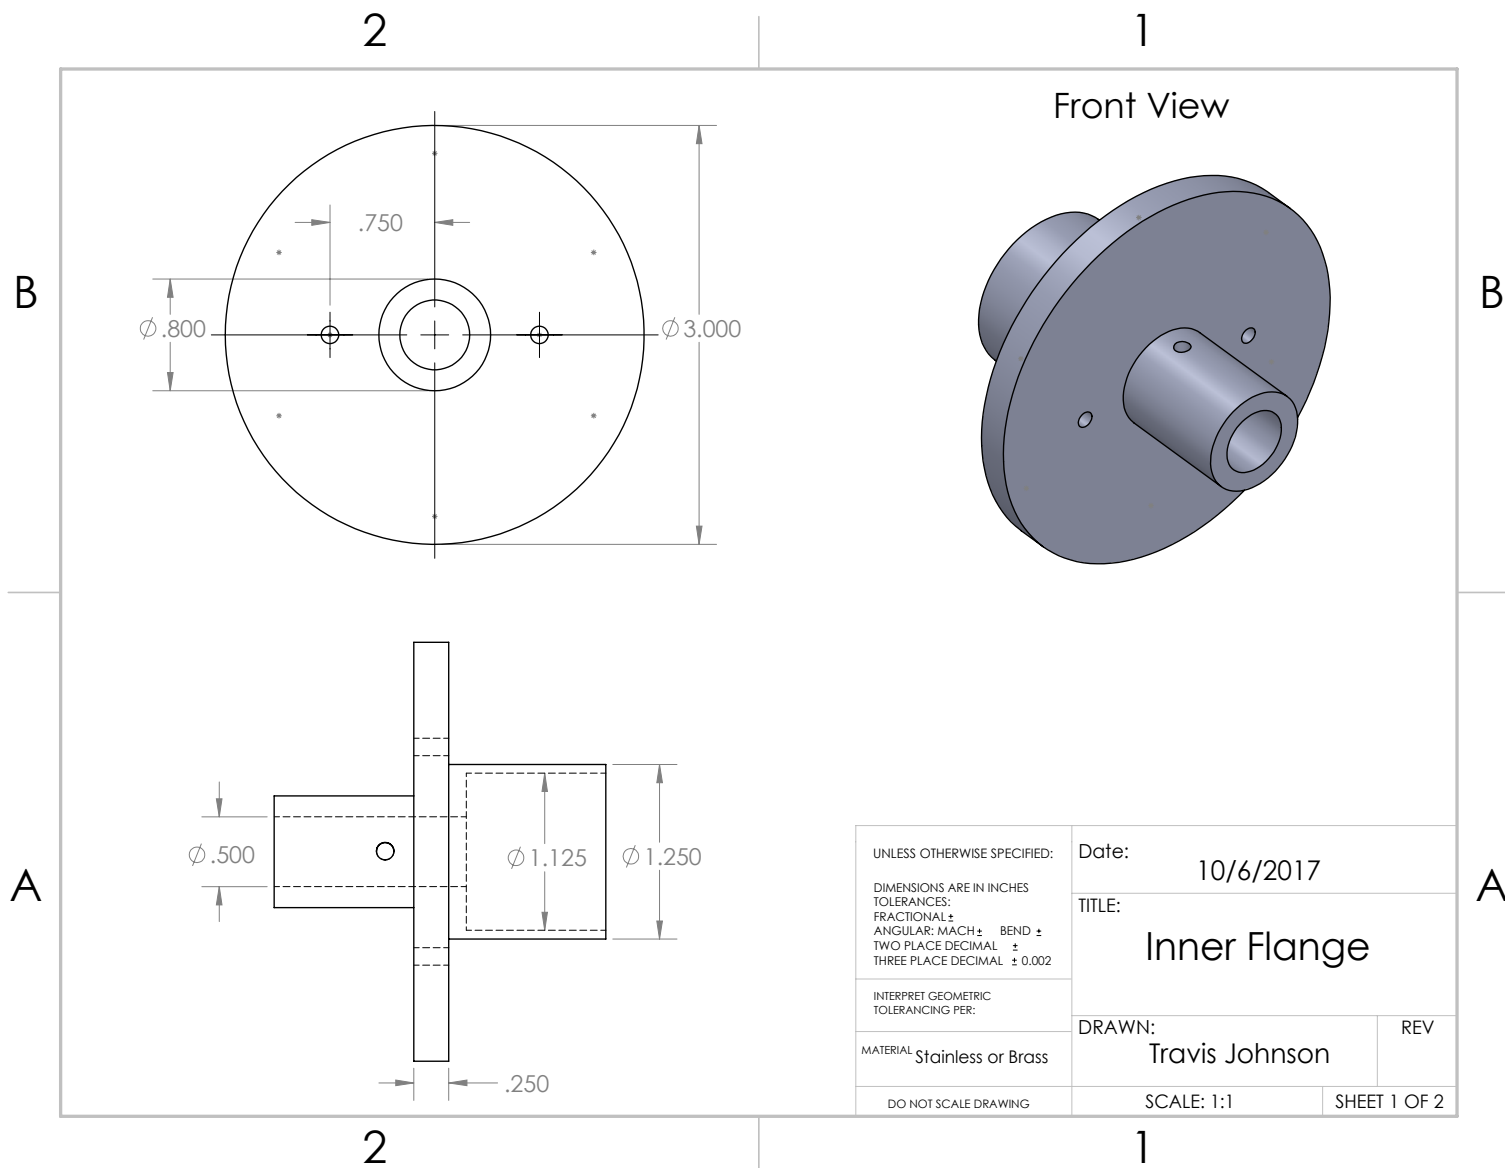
Page 1 detailing the third piece of the three piece flange. Image taken from SolidWorks®.
